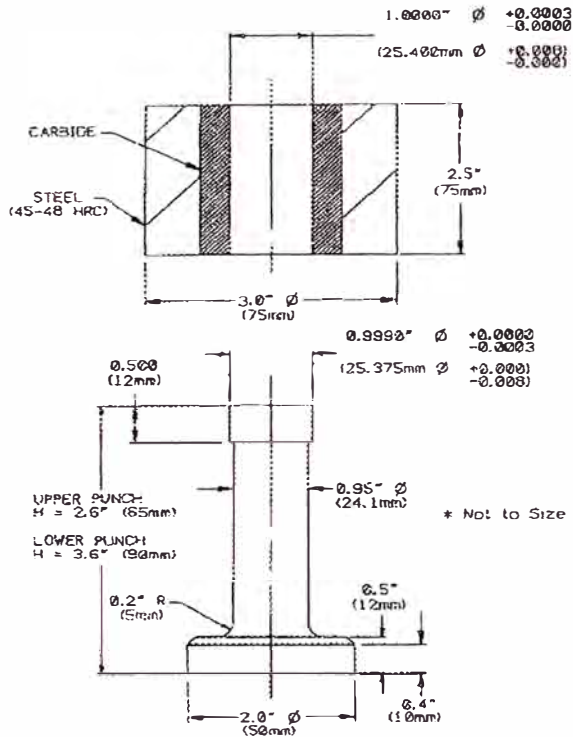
Example of Tooling to Produce the Circular Test Specimen.
